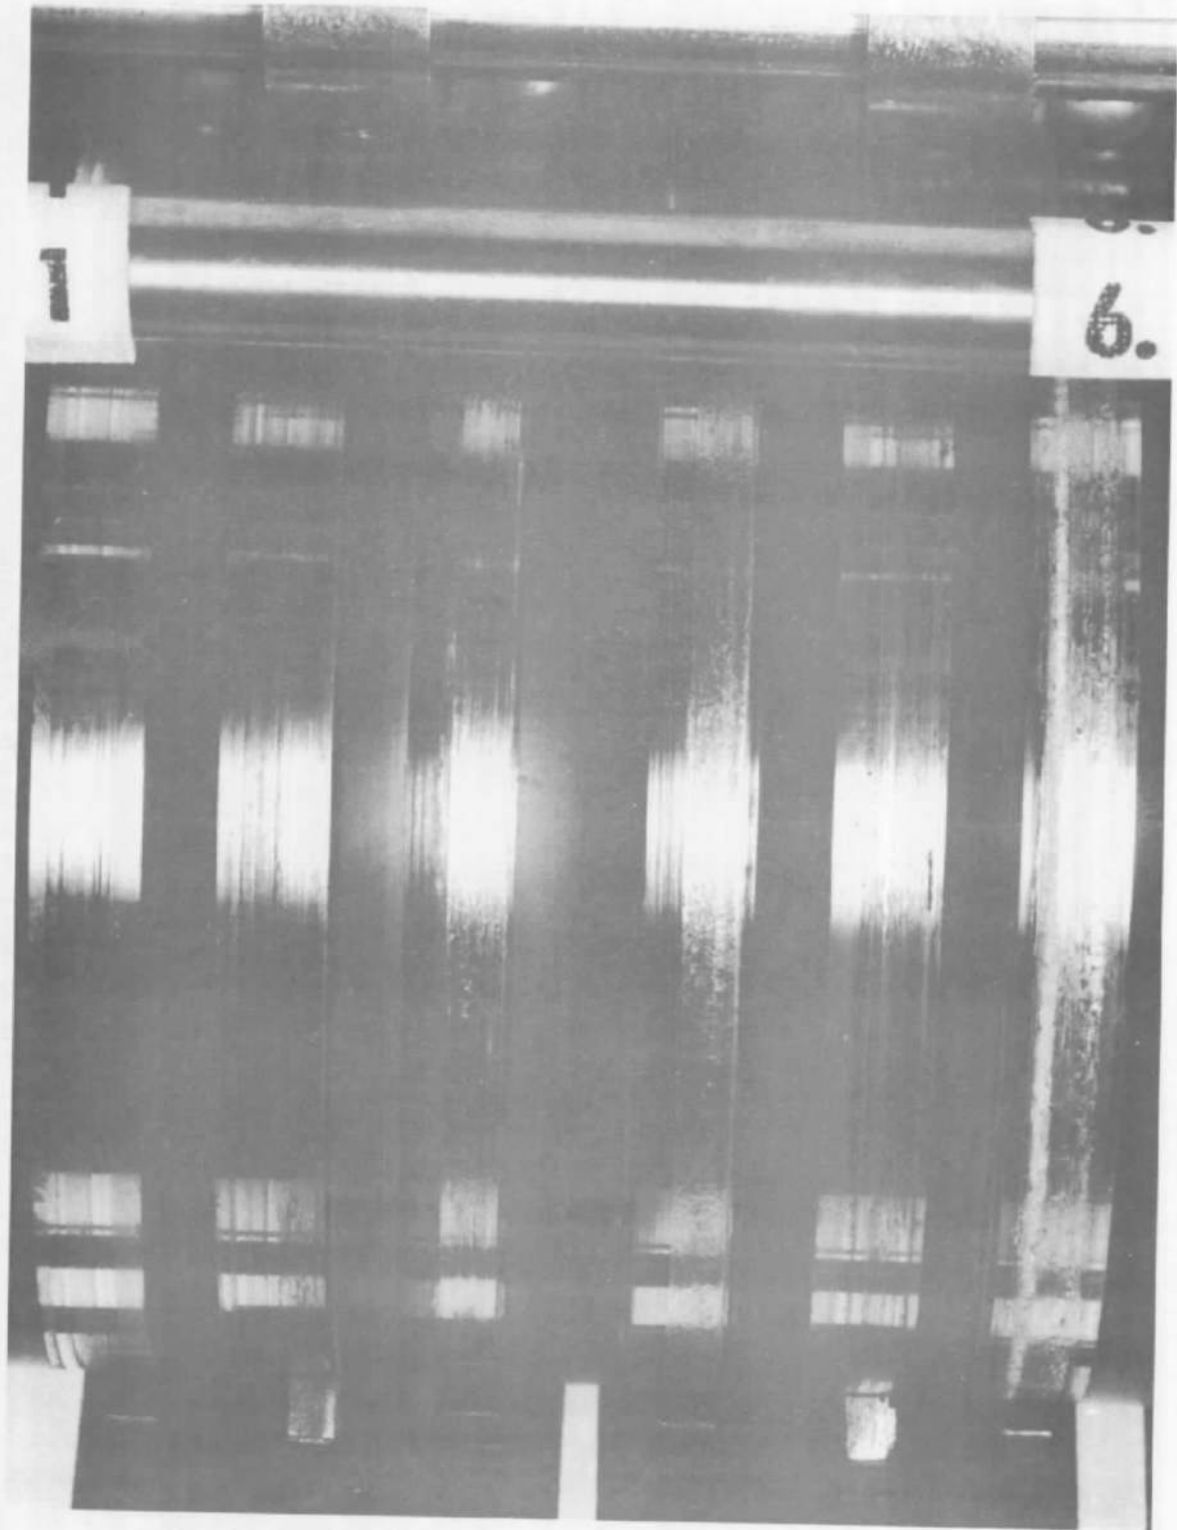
Detail at Positions 1 Through 6 of Assembly 2 After Testing
